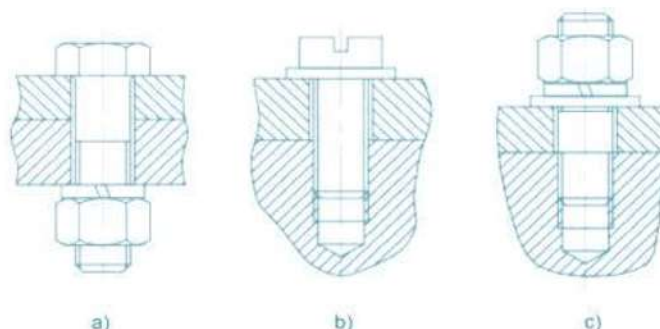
Three types of joints a) Bolted joints, b) Screw joints, c) Stud joints.
